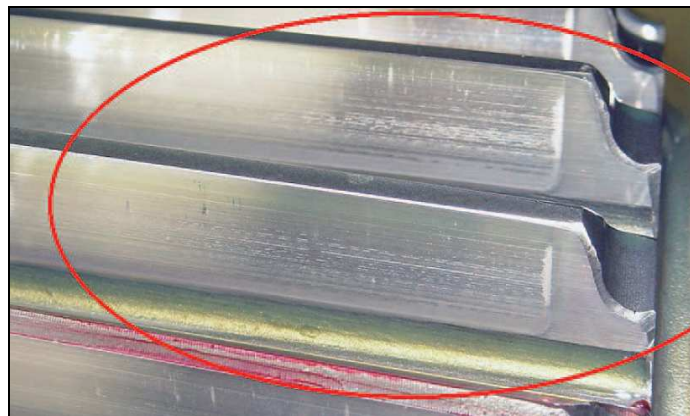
Micropitting on a sun gear of a wind turbine gearbox [1]
